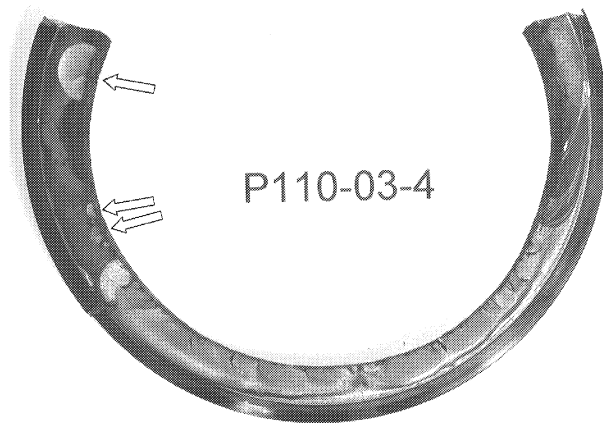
Fracture surface of a rolled specimen with three semi-elliptical cracks that had started from pipe inner surface.
